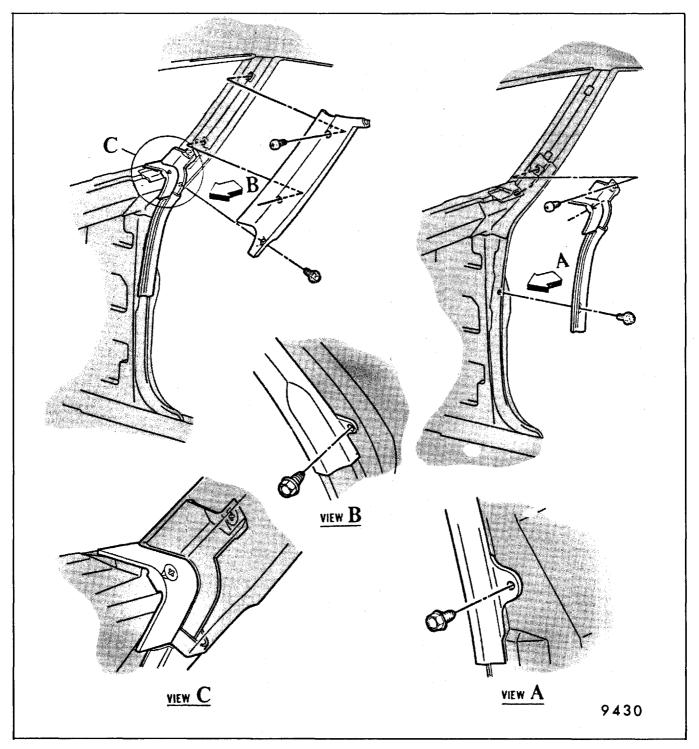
Windshield Pillar Side Garnish Molding - B, C Styles Typical
